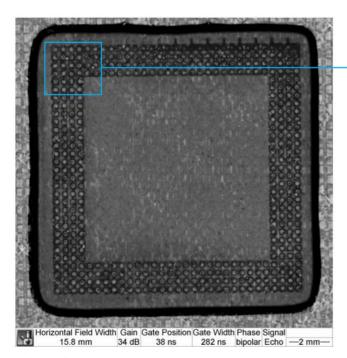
C-scan mode of an underfilled BGA assembly after micro-mechanical polishing.
